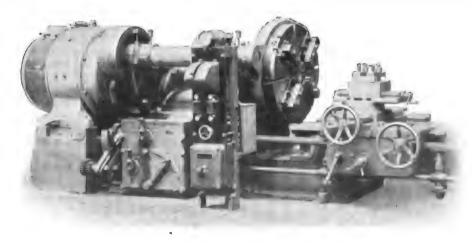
GENERAL VIEW OF VARIABLE-SPEED MOTOR DRIVING LATHE.
